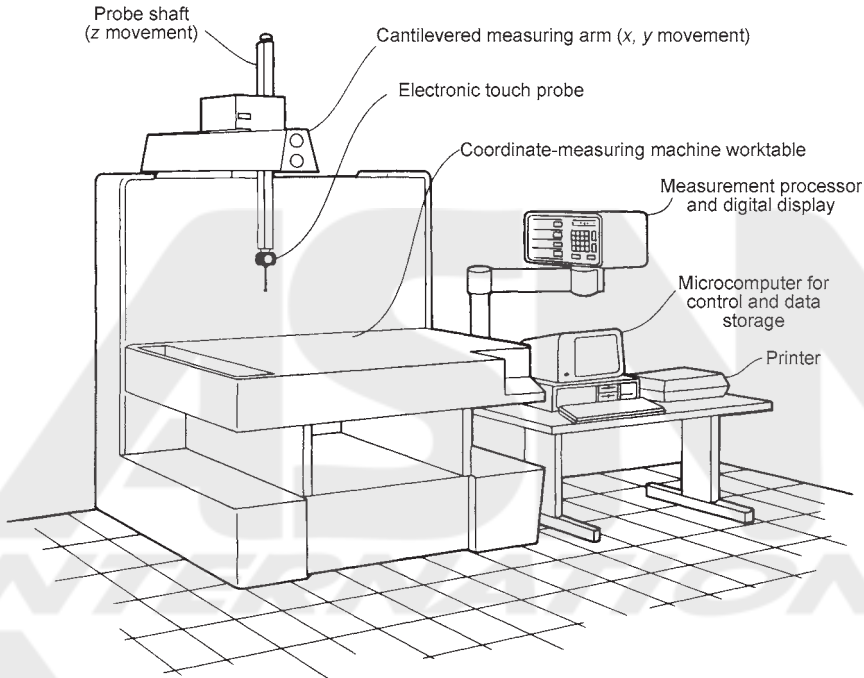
Equipment used in a typical installation for the computer-aided dimensional inspection of castings showing a coordinate measuring machine and microcomputer. Source: Ref 2
